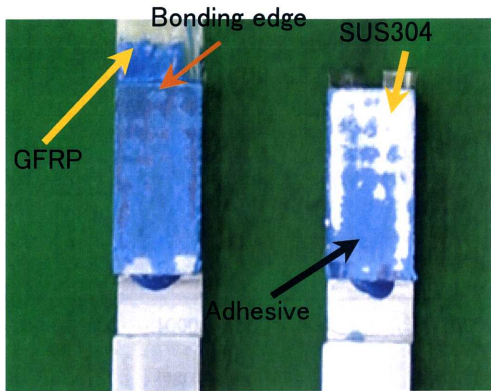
Fracture surface of adhesive joints degraded at 60 °C in the water for 216 hours.
